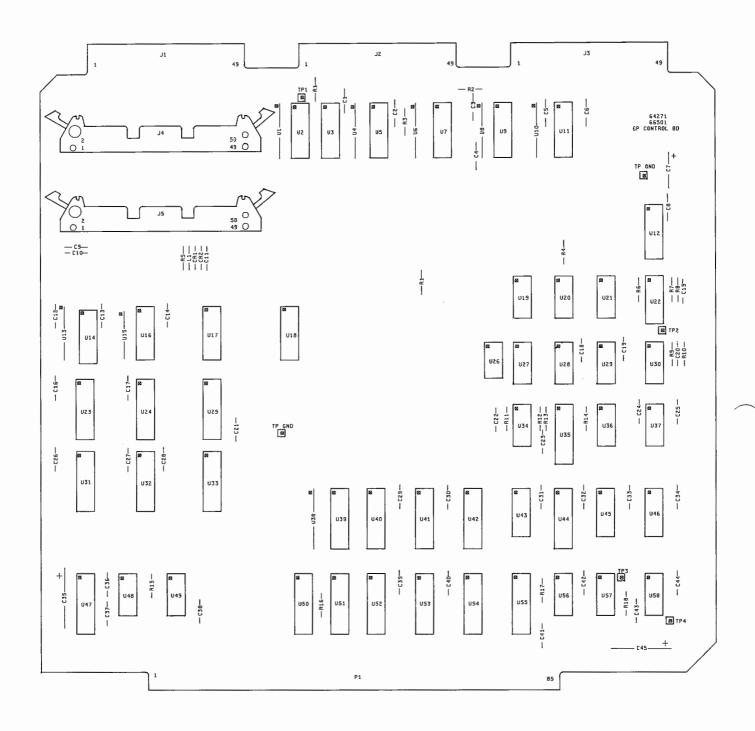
Illustrated Parts Breakdown (Sheet 2 of 2)
